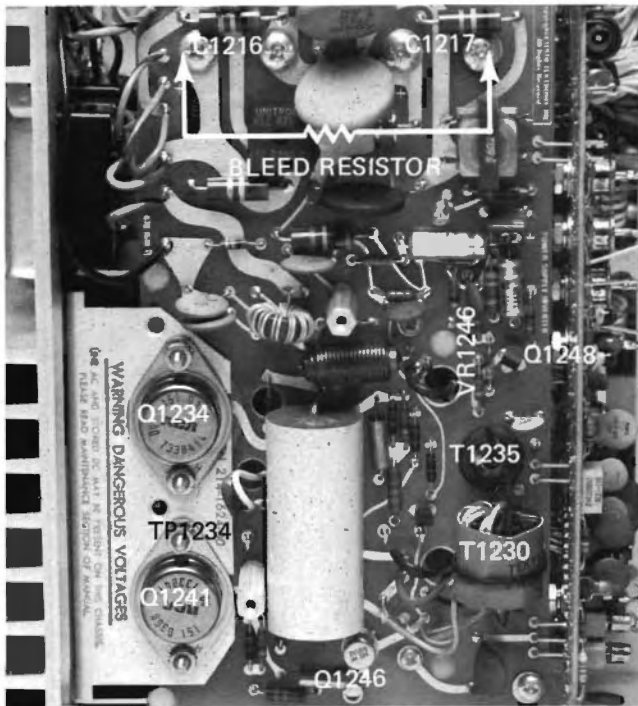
Partial view of the inverter board showing where to apply bleeder resistor to discharge C1216 and C1217.
